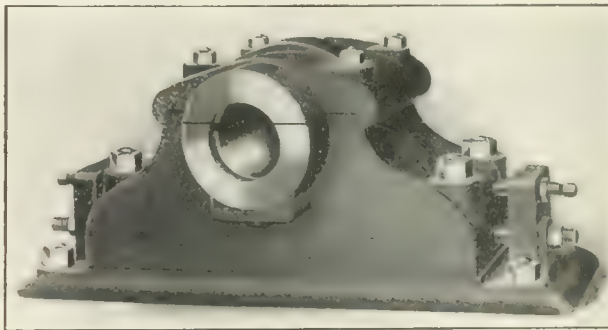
The New Rolling Mill Bearing Made by the Hill Clutch Company, Cleveland, Ohio.
